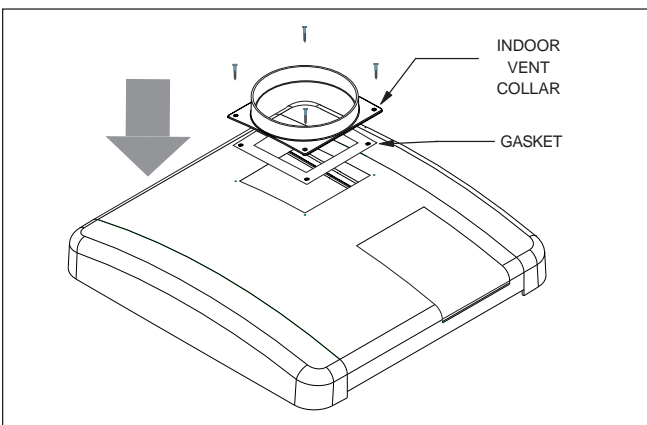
Vent Collar Assembly for Indoor and Outdoor Shelter Installation
